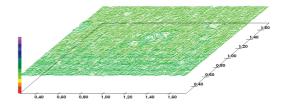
PCD tool turned v_c =75 m/min., a = 0.02 mm, f = 0.02 mm/rev.
